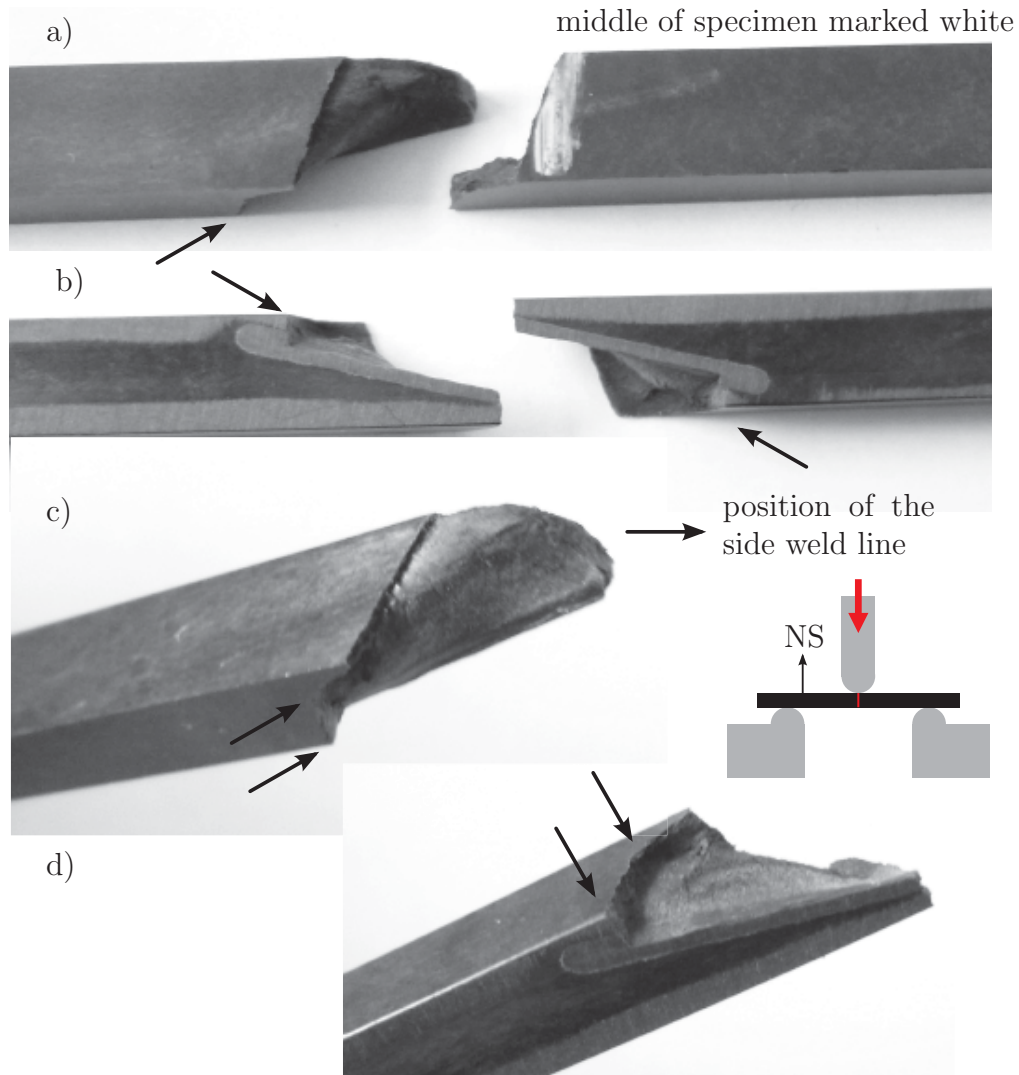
Fracture surface of a tensile tested specimen with a modified weld line. Similar to the non weld line specimens a very large surface is created during rupture.
